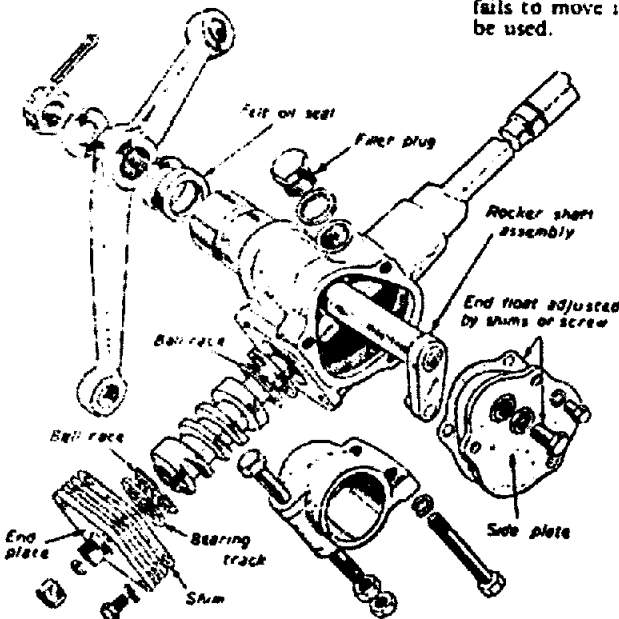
Exploded view of a Bishop Cam steering-box.
